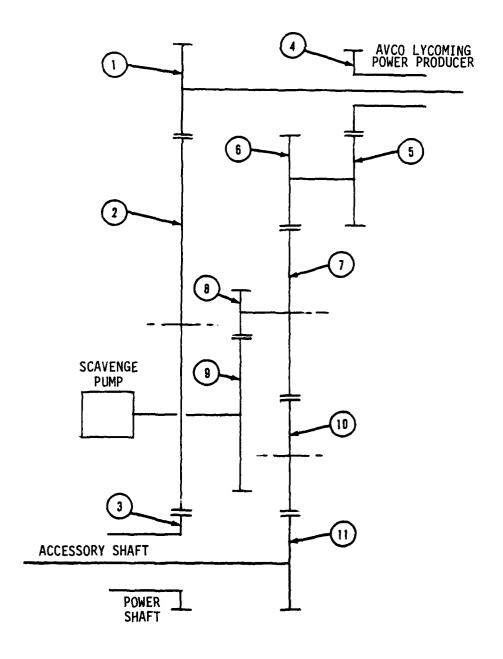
Adapter Gearbox Gear Schematic - Power and Accessory Train.
